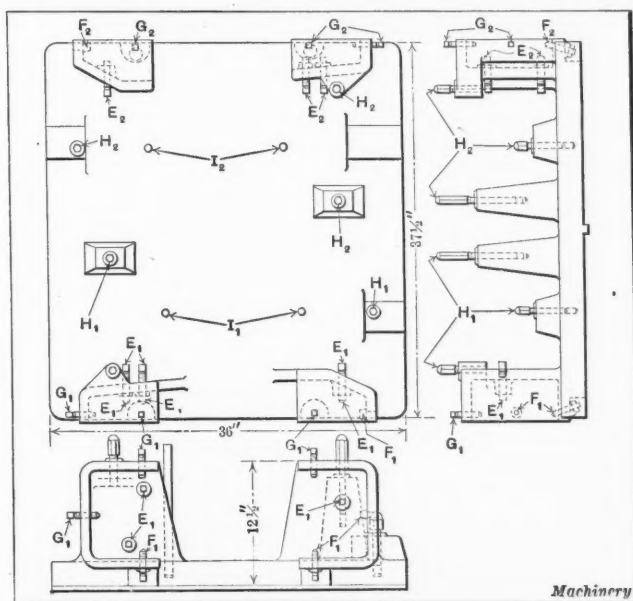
Design of Work-holding Fixture used on Machine shown in Fig. 1
